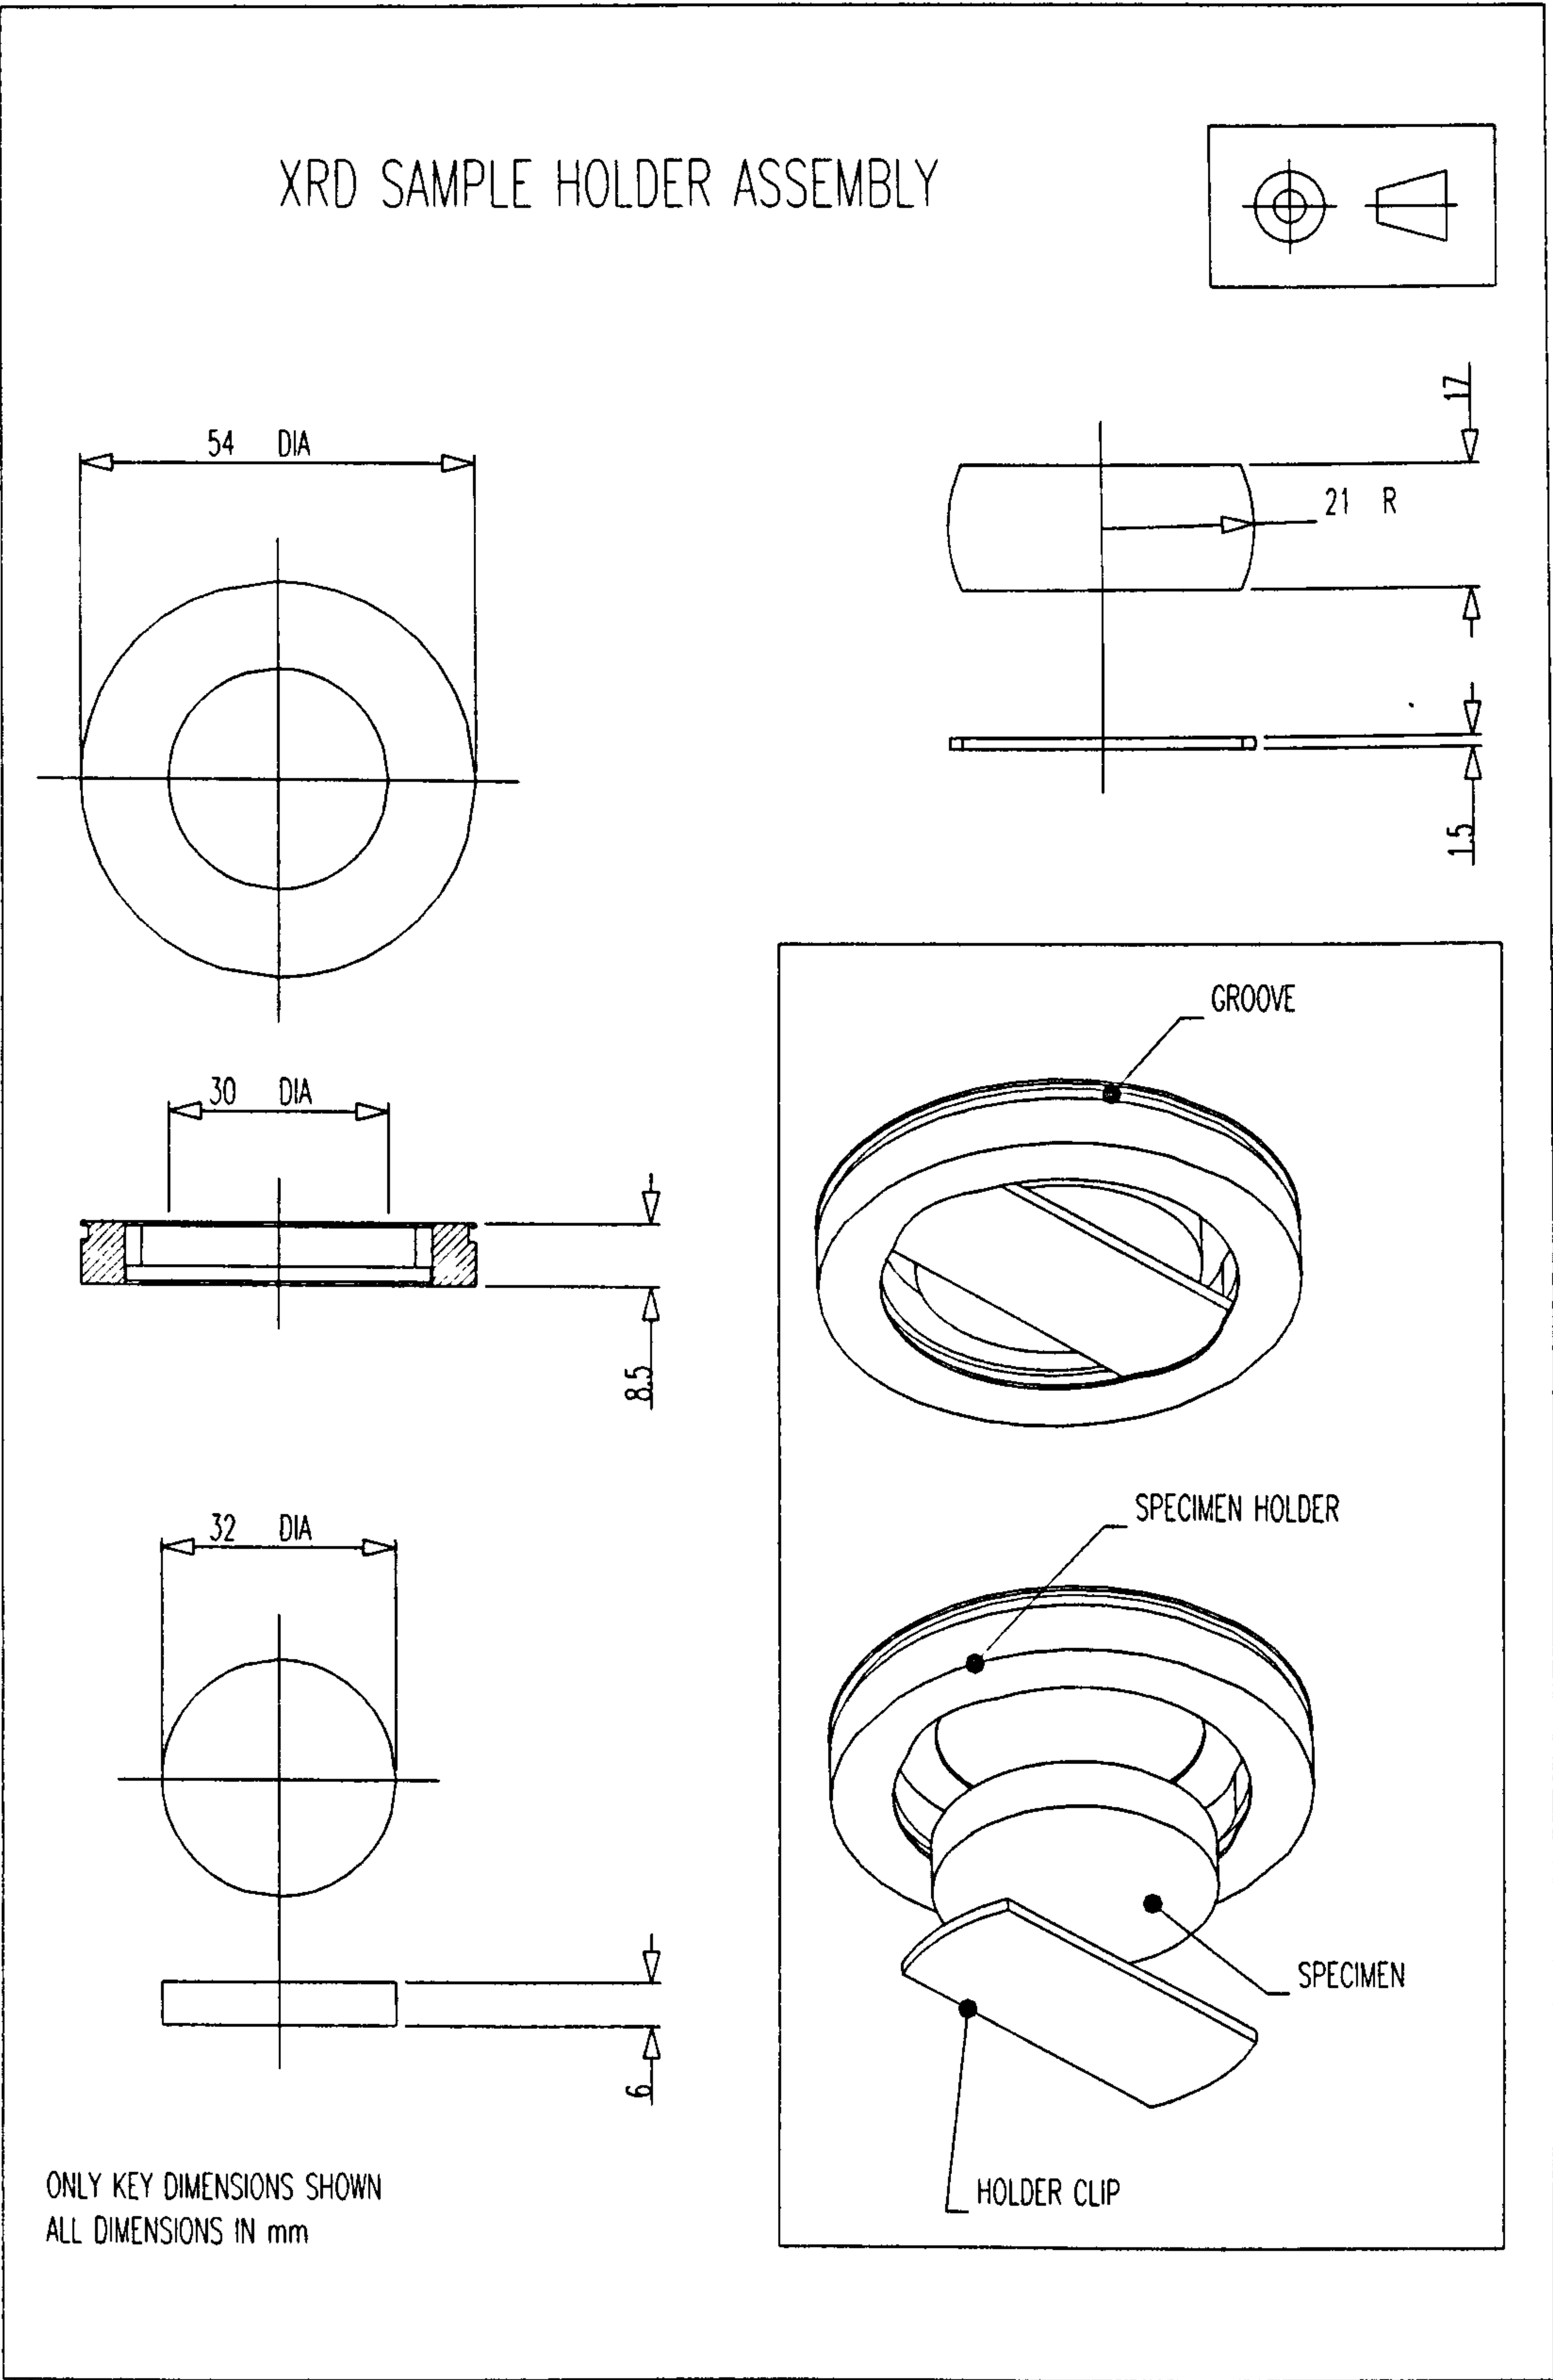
Specimen Holder Assembly for X-ray Diffraction Investigations of Disc Samples.
